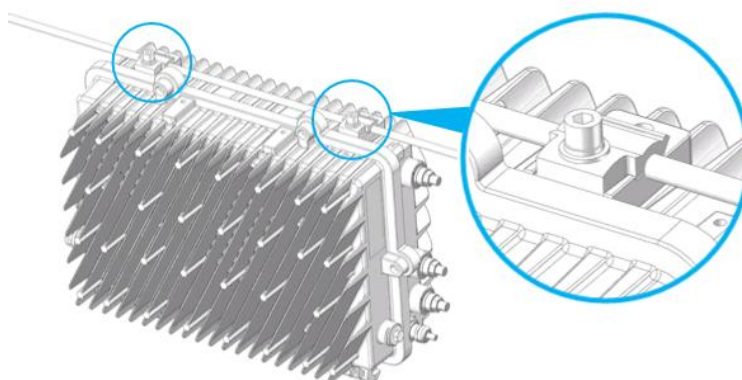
SLINGSHOT NODE 3.0 CMTS installation diagram when using mounting for ears steel wire or a bar
